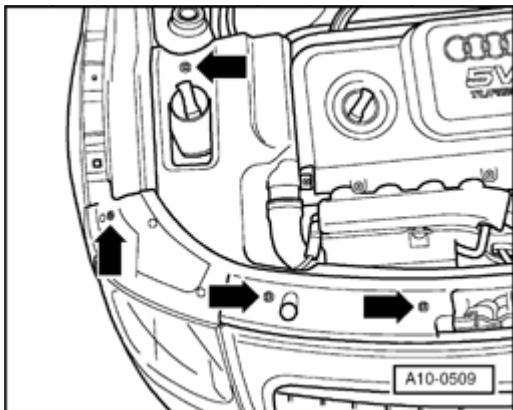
Removing Covers At Lock Carrier And Above Coolant Expansion Tank
